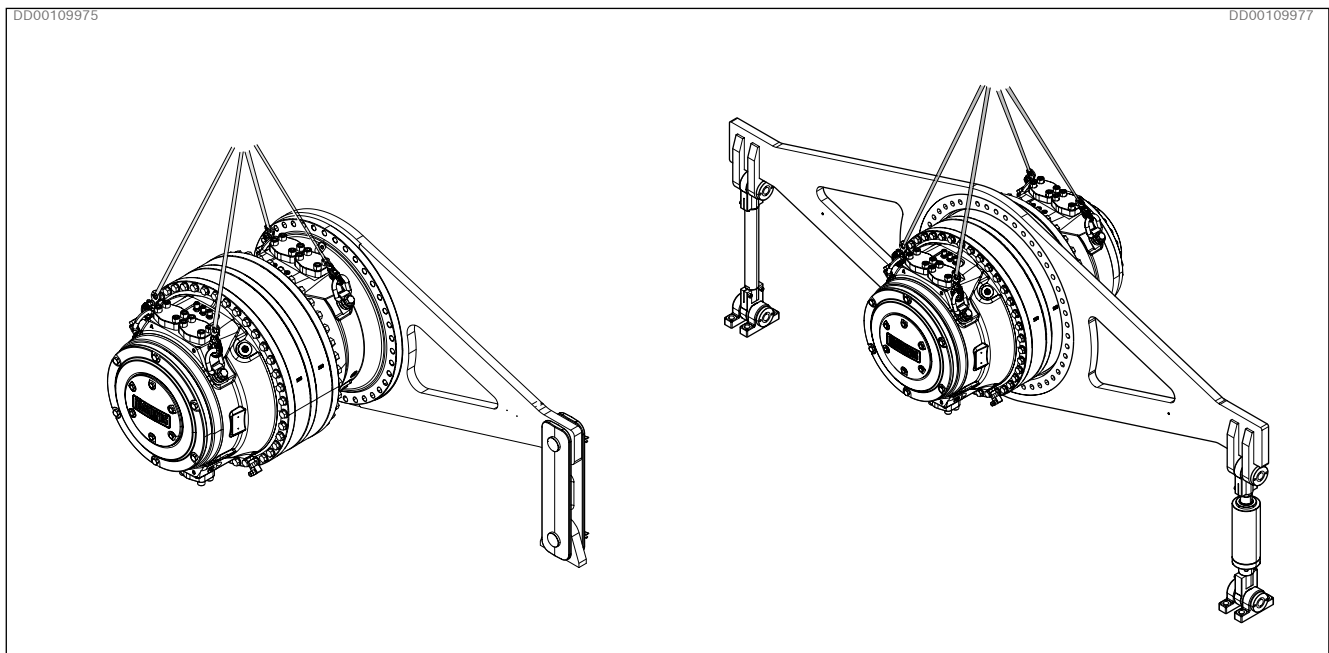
Example, lifting of motor mounted to single/double ended torque arm
